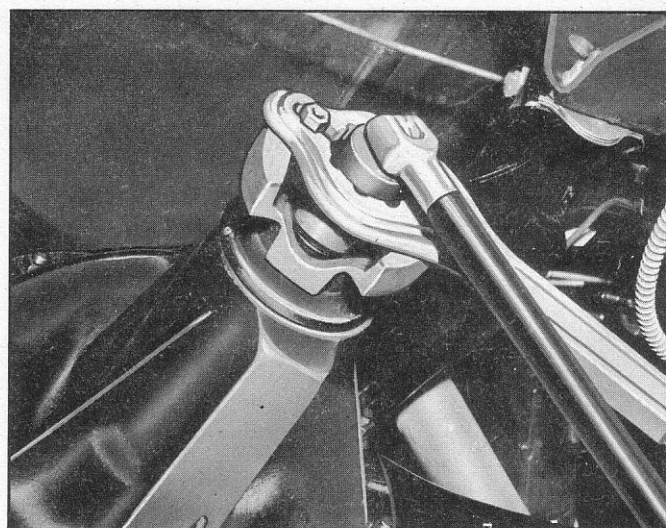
Removing Companion Flange Nut—J-8614 Shown
